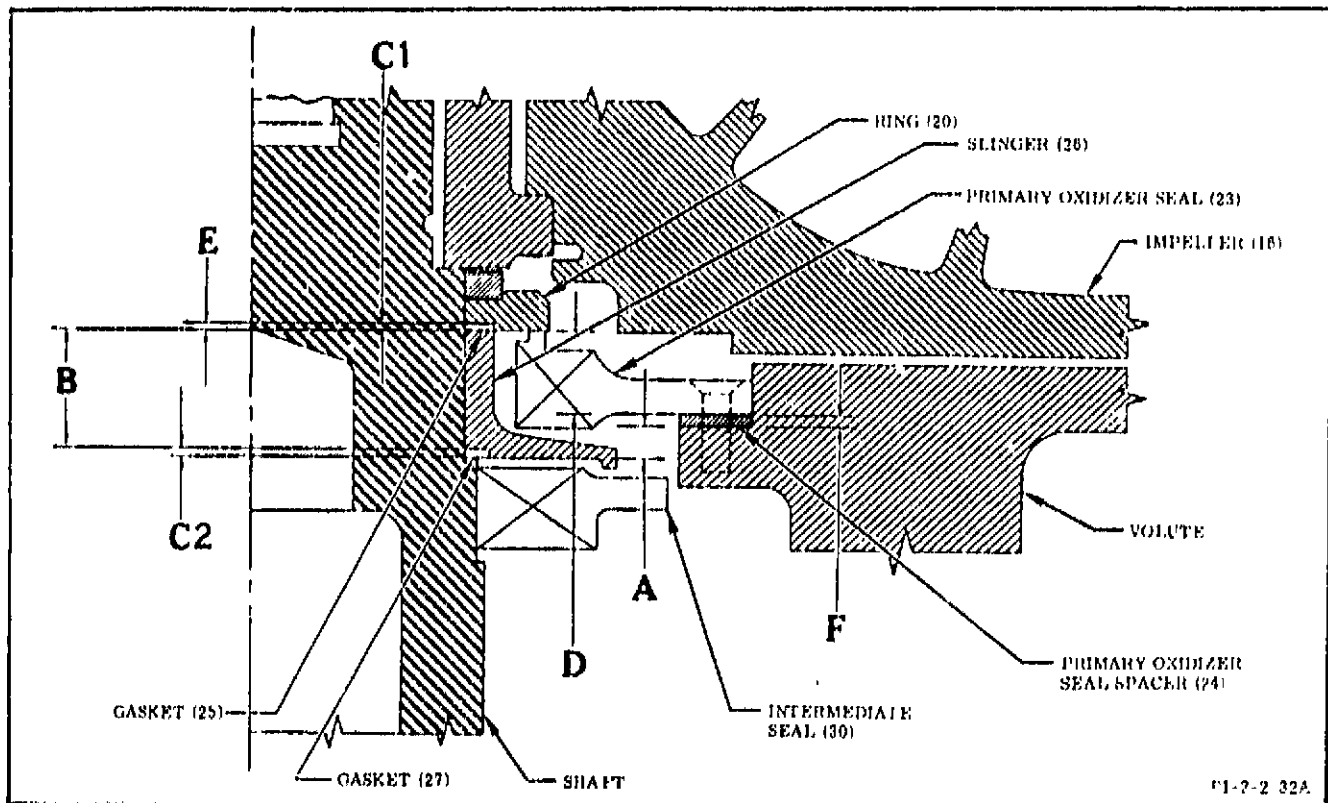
Determining Primary Oxidizer Seal Spacer Thickness
